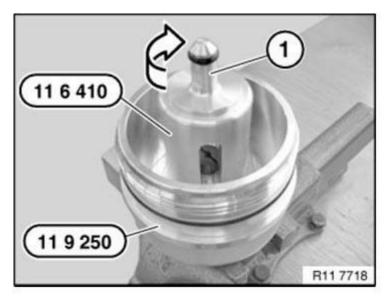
Tightening Screw Piece Courtesy of BMW OF NORTH AMERICA, INC.
